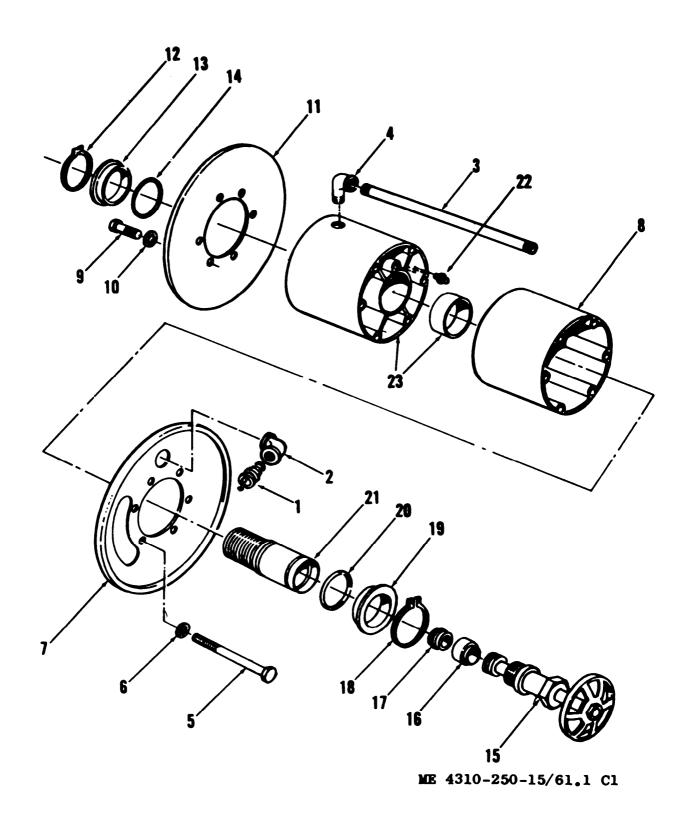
B — Hose reels, exploded view Model 6M250RPV.
